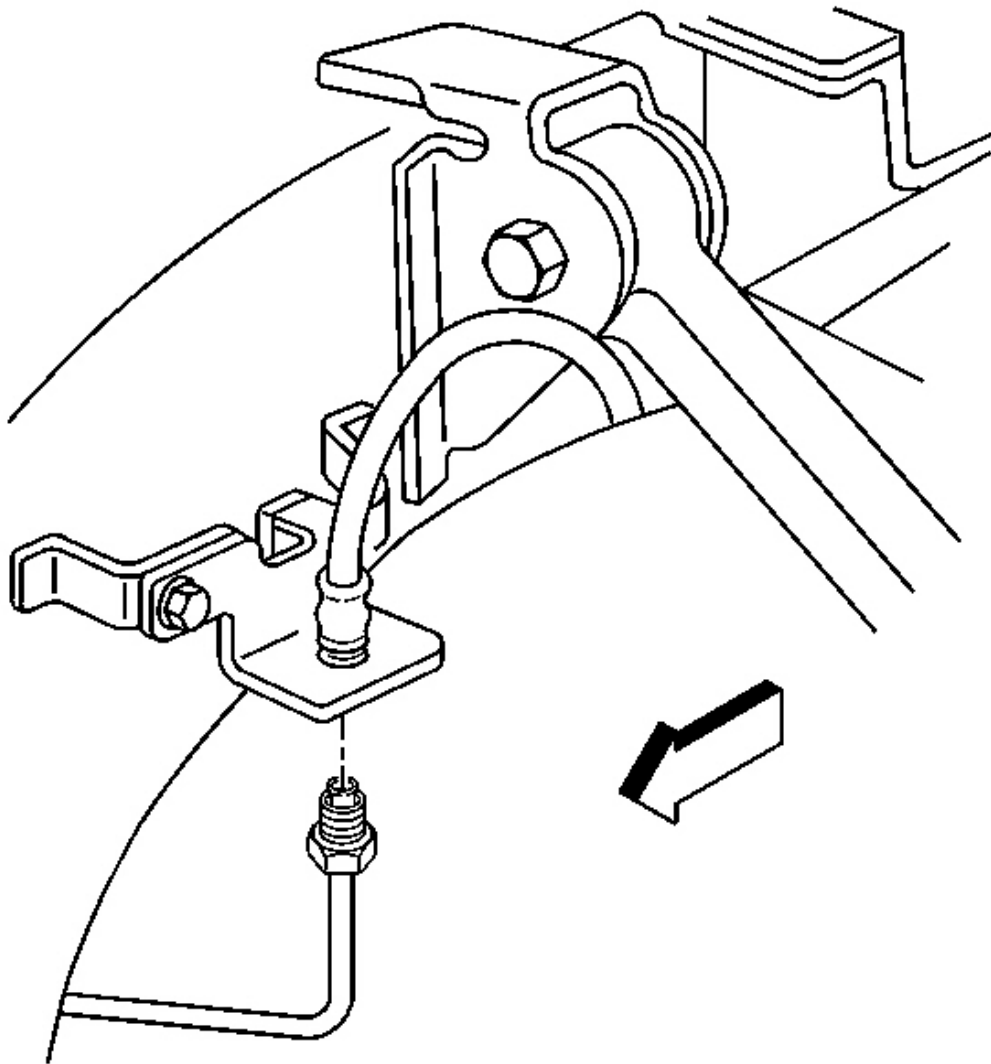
Rear Tire And Wheel Assembly & Brake Pipe Fitting End
